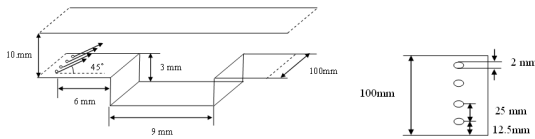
Cavity flameholder(Left) and fuel injectors(Right)
